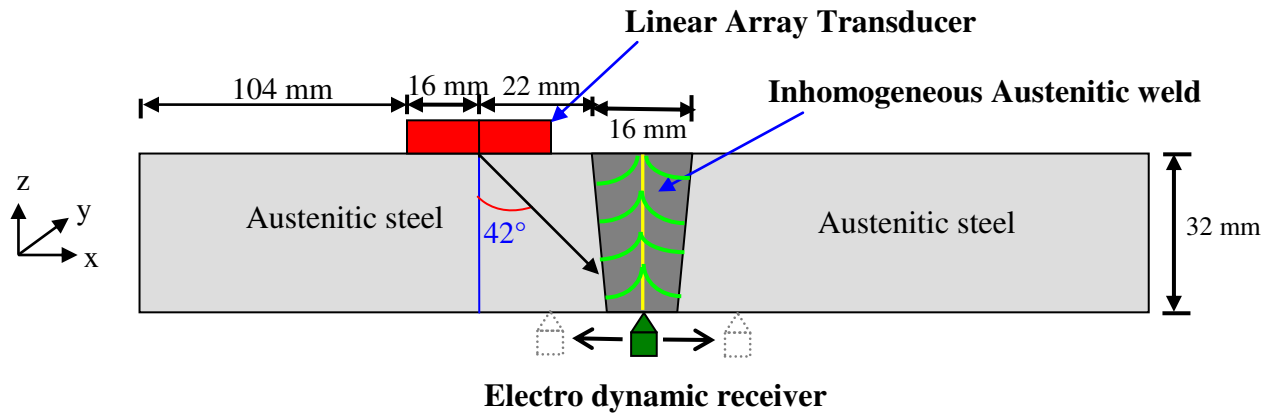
Geometry of the austenitic weld component and location of the transmitter used for the sound field measurements.
